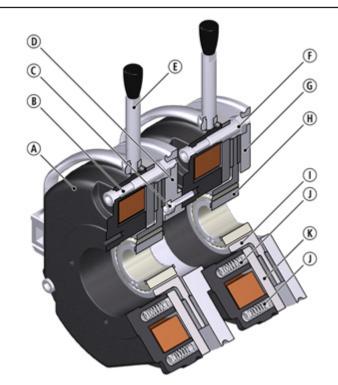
Design of the INTORQ BFK458 spring-applied brake: Basic module N, doubled design with intermediate flange
